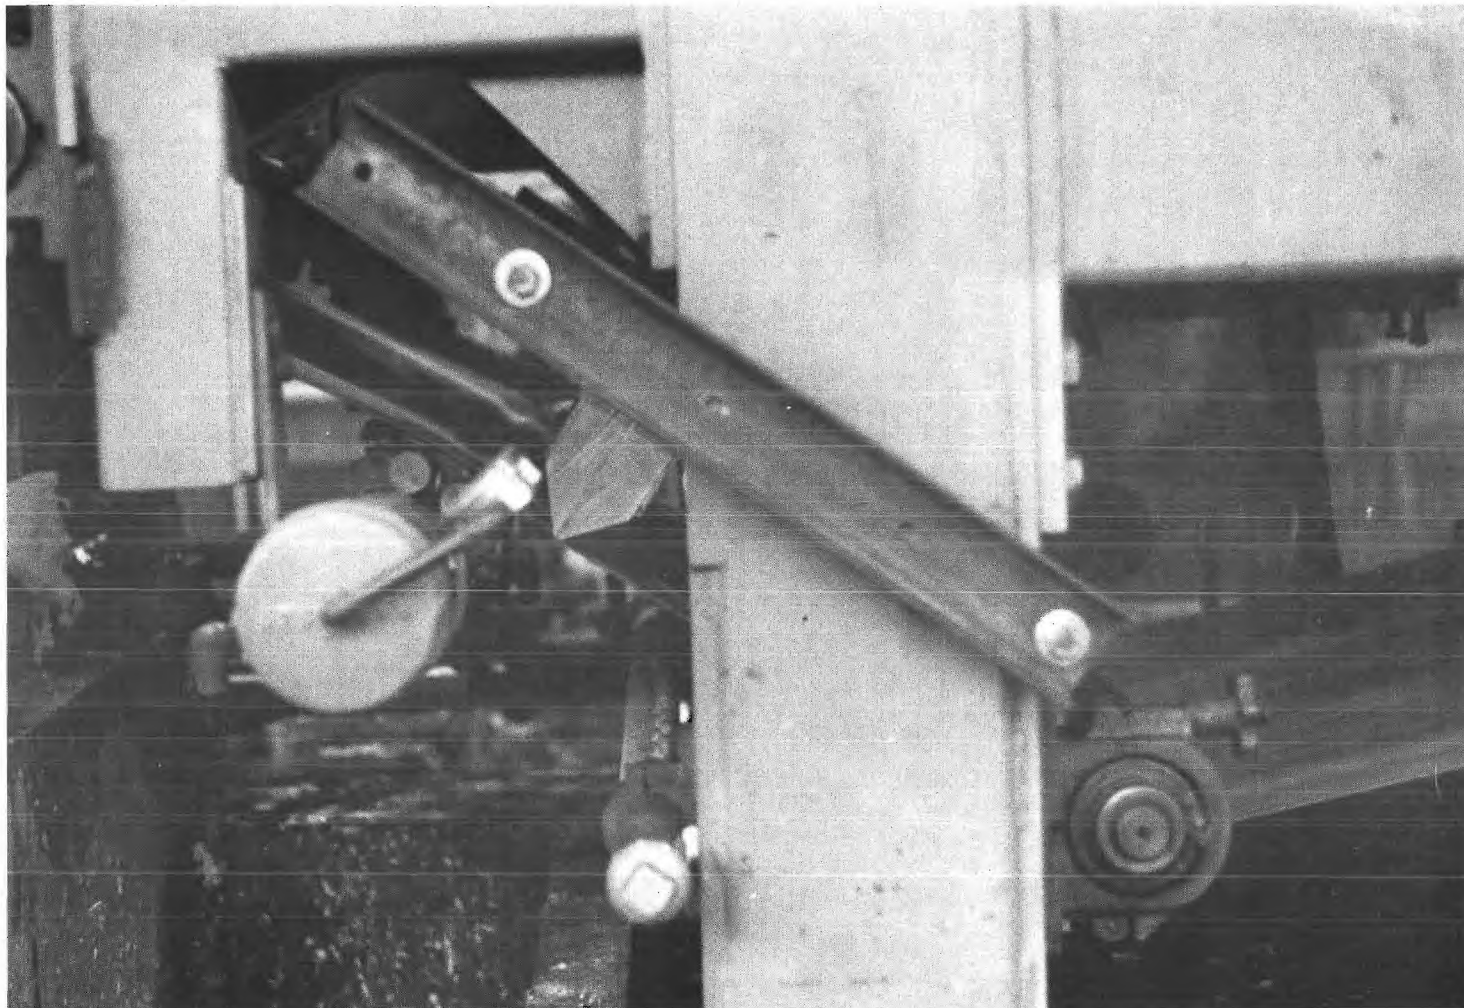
MACHNOZZLE ON THE PILOT PAPER MACHINE.
